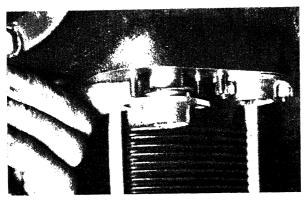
Dermatine jointing rings are fitted between tappet guide flange and crankcase.
